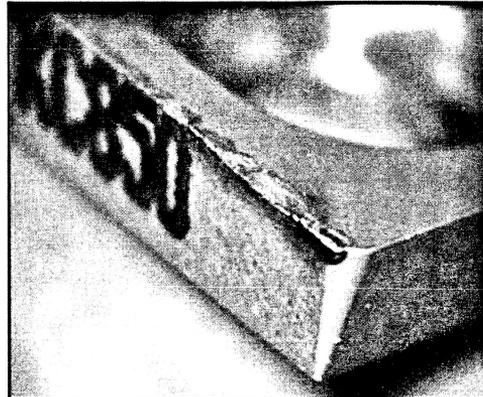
Higher tool life obtained for K313 when machining Vanadis 10 at feed rate 0.05 mm/rev and cutting speed 80 m/min
